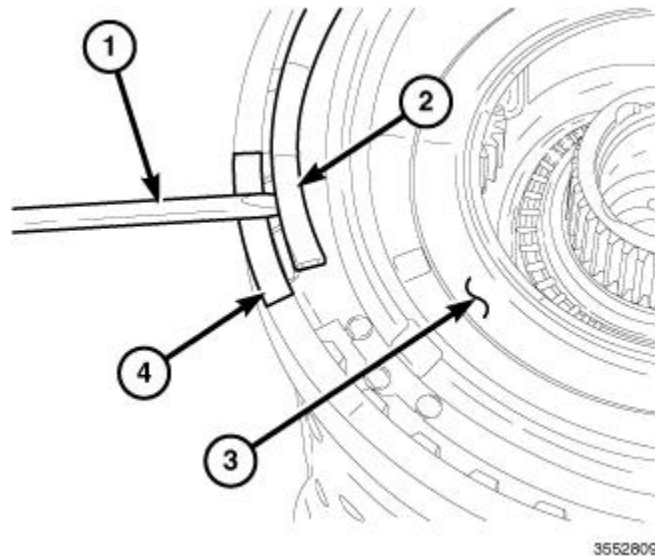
Support Rings, Tool & P3 Planetary Carrier
